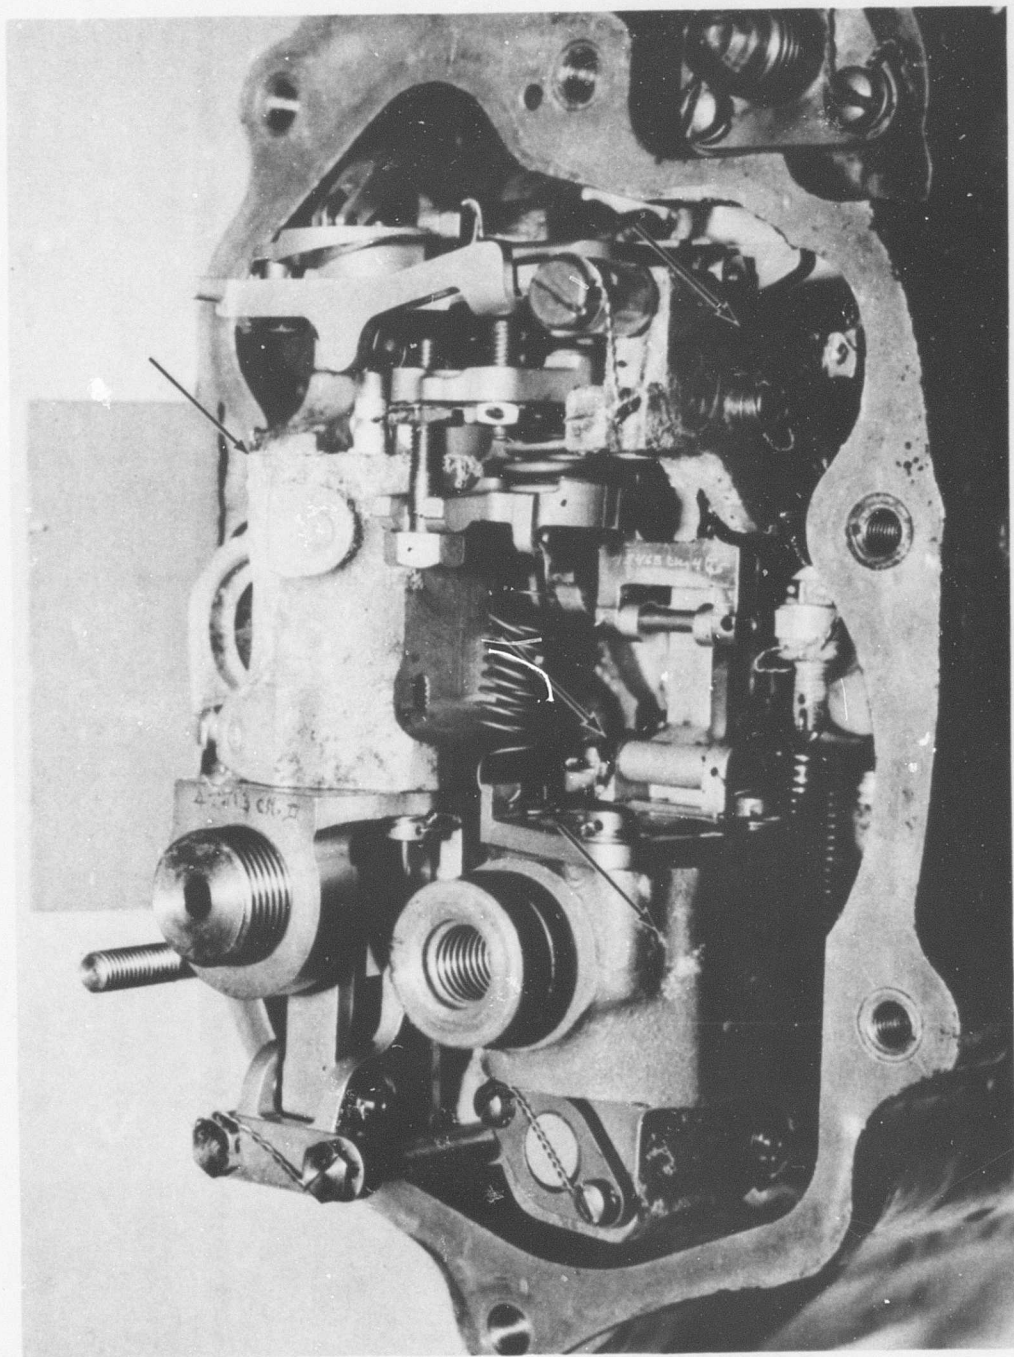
Fuel Control Computer Assembly; Overall View. (Note rust deposits and corrosion of the anodized surfaces.)
